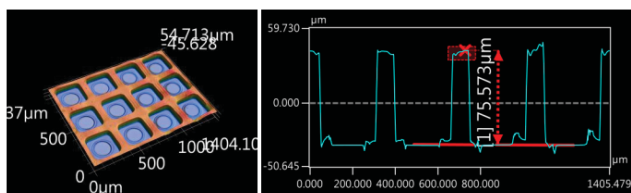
Keyence measurement result of the unfilled solder paste groove.
